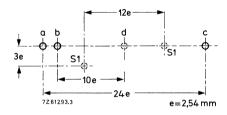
Hole pattern in the printed-wiring board for a single potentiometer (viewed on component side).
